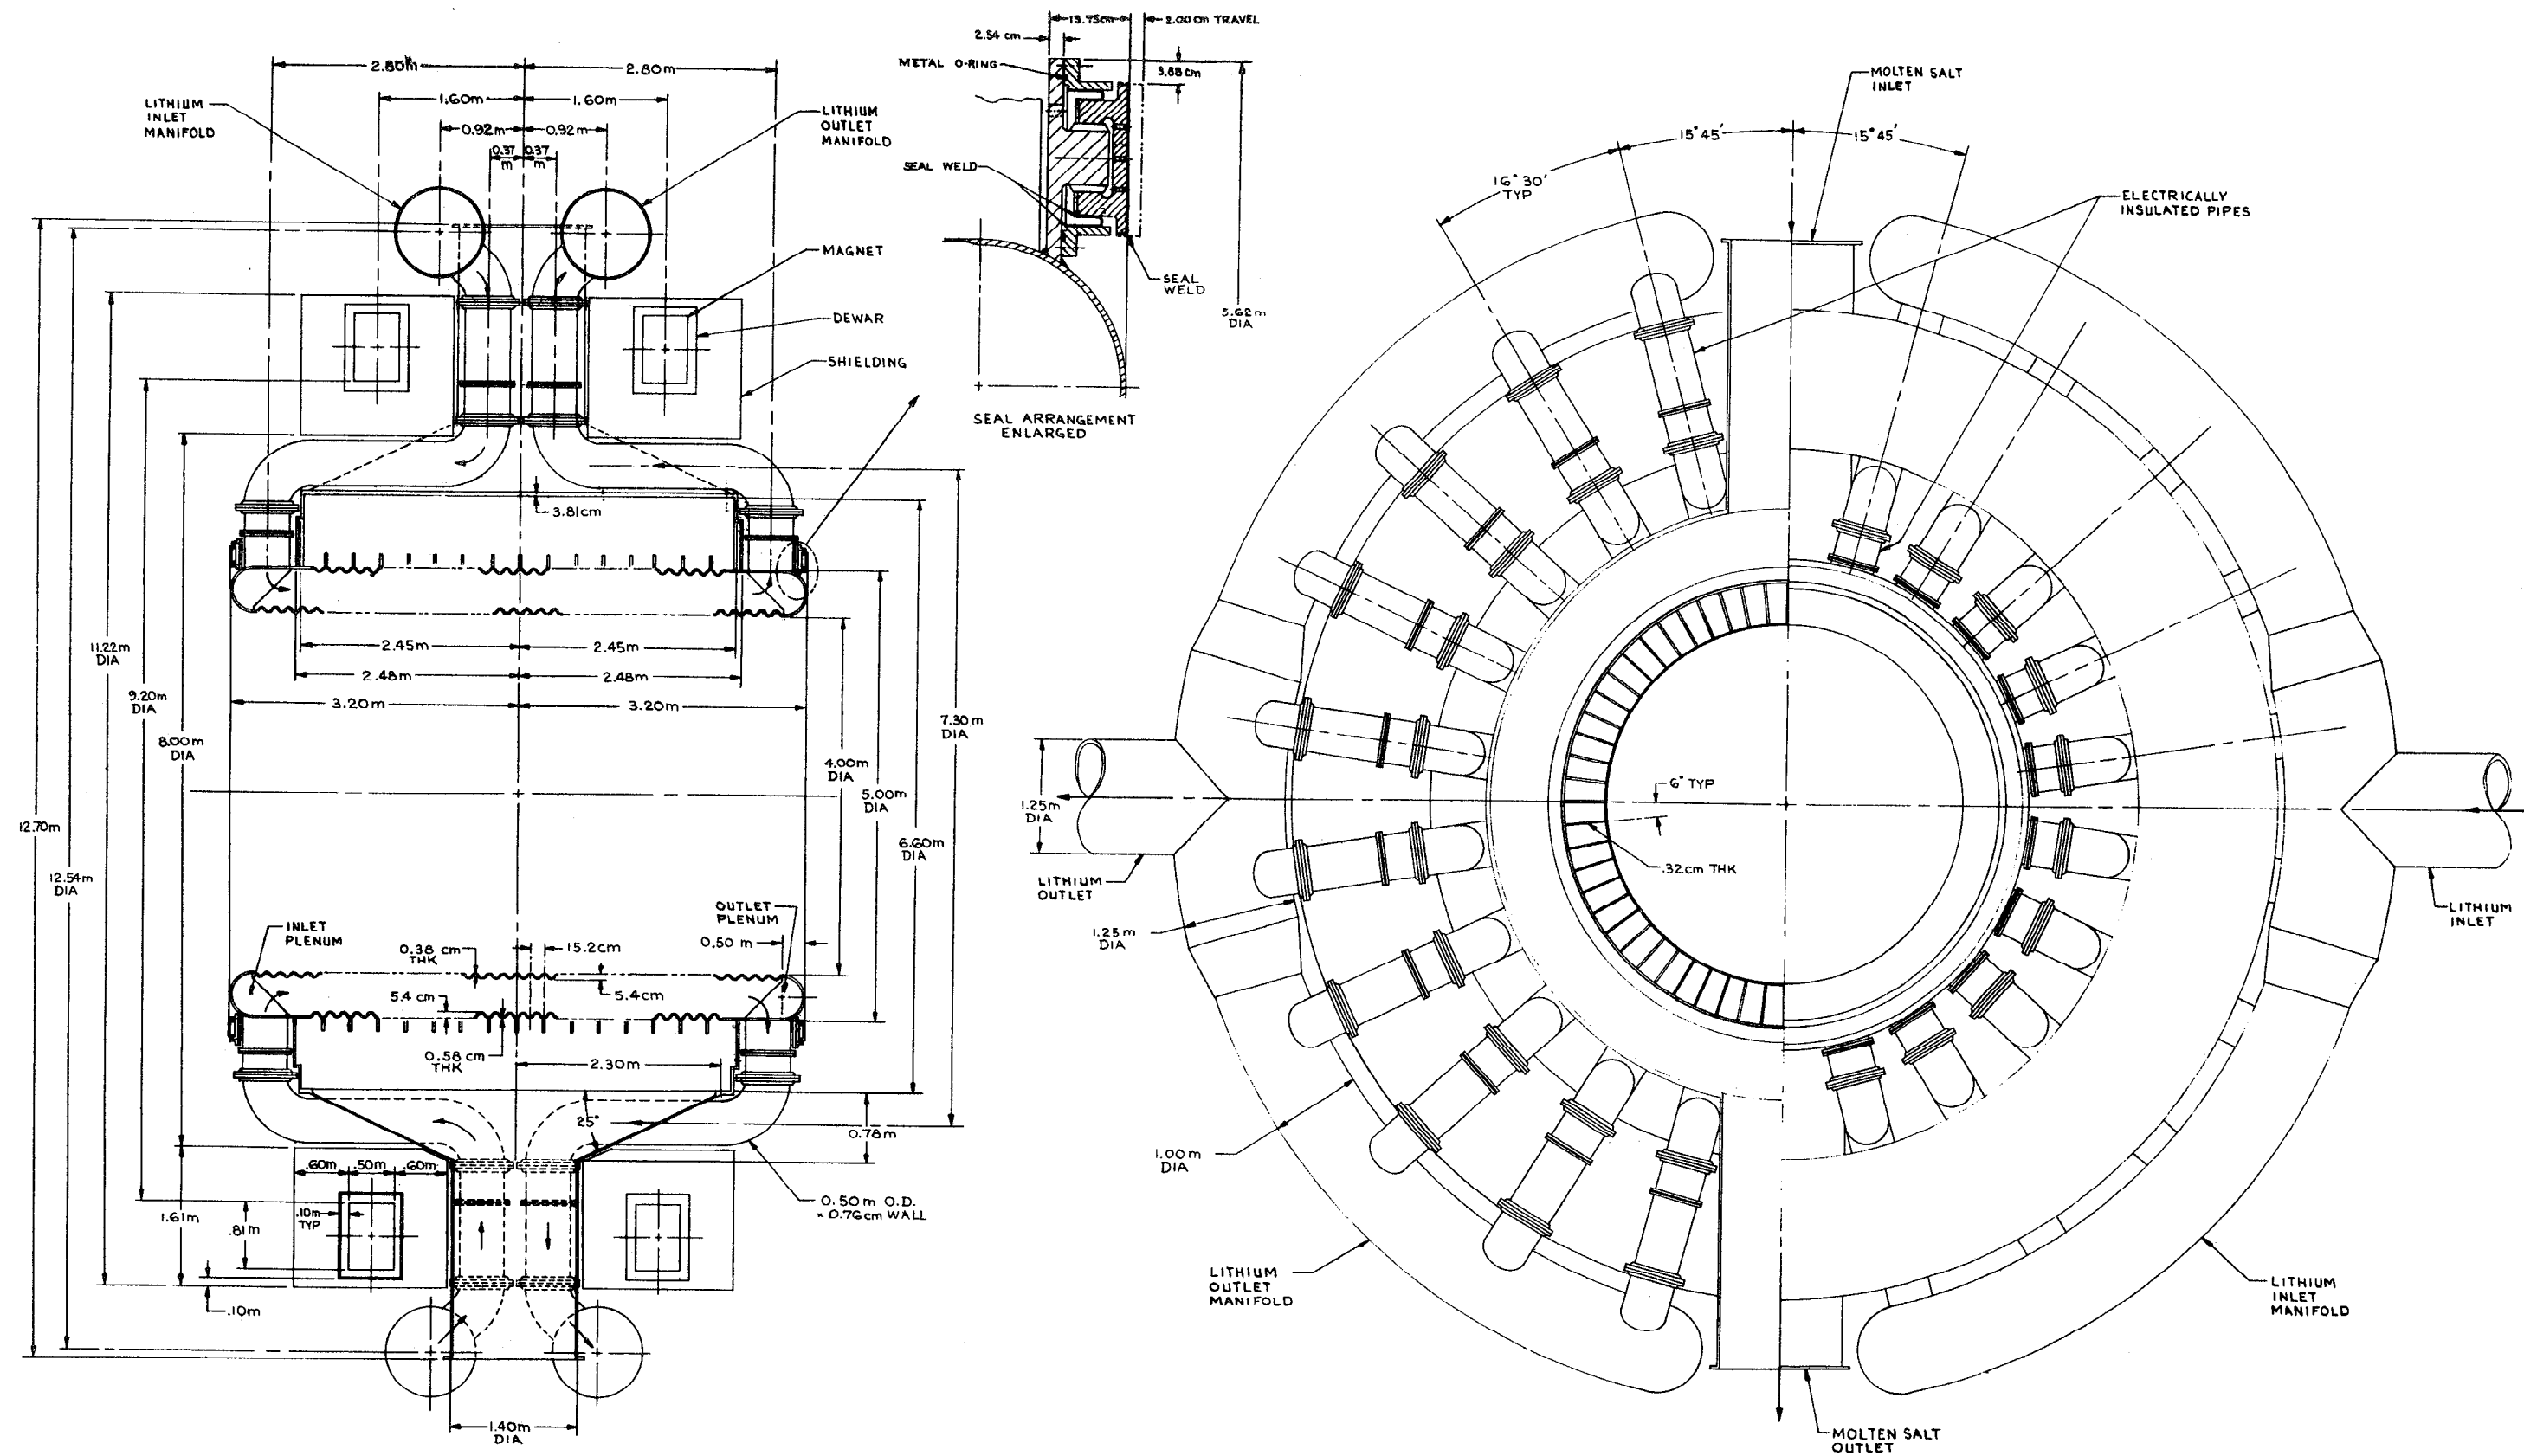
Component arrangement and dimensions for the reference TMHR liquid Metal cooled blanket module assembly.
